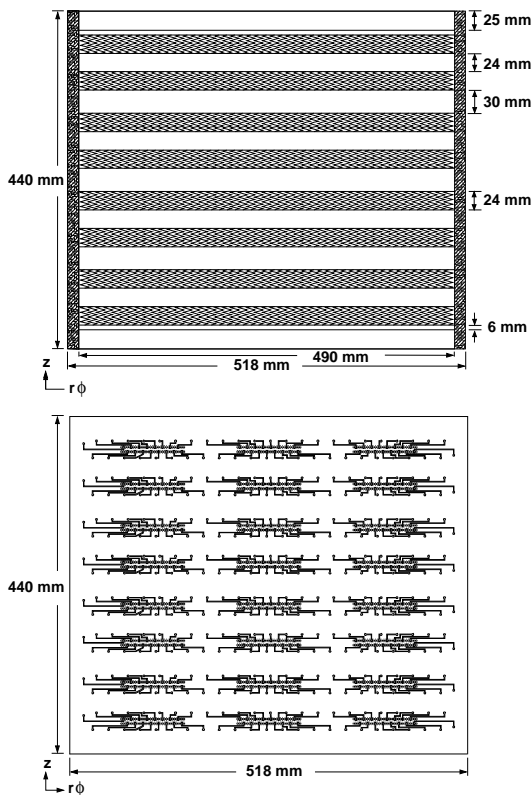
Top: Pad side of a pad plane. Bottom: Readout side of a pad plane.
